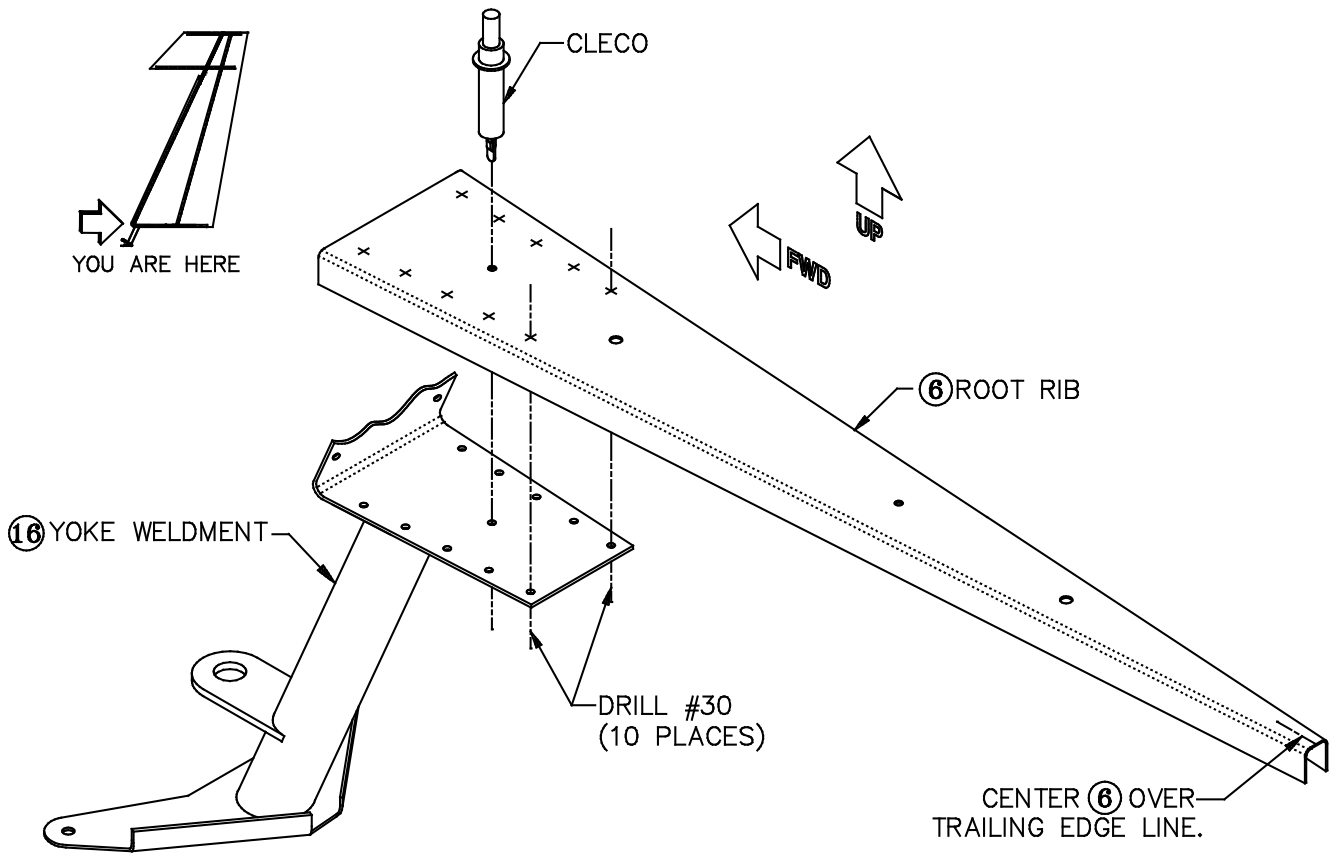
Root Rib/Yoke Weldment Assembly
